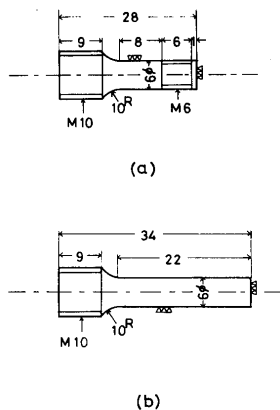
Specimen dimensions of implant specimen for implant weld test. (a): with spiral notch, (b): without notch
